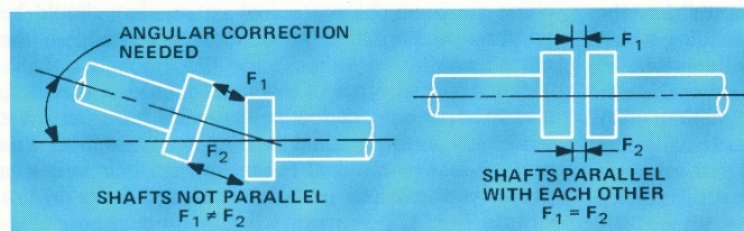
The face-alignment check (also called the coupling-gap or face check) reveals the angular correction needed to make the shafts parallel to each other.
